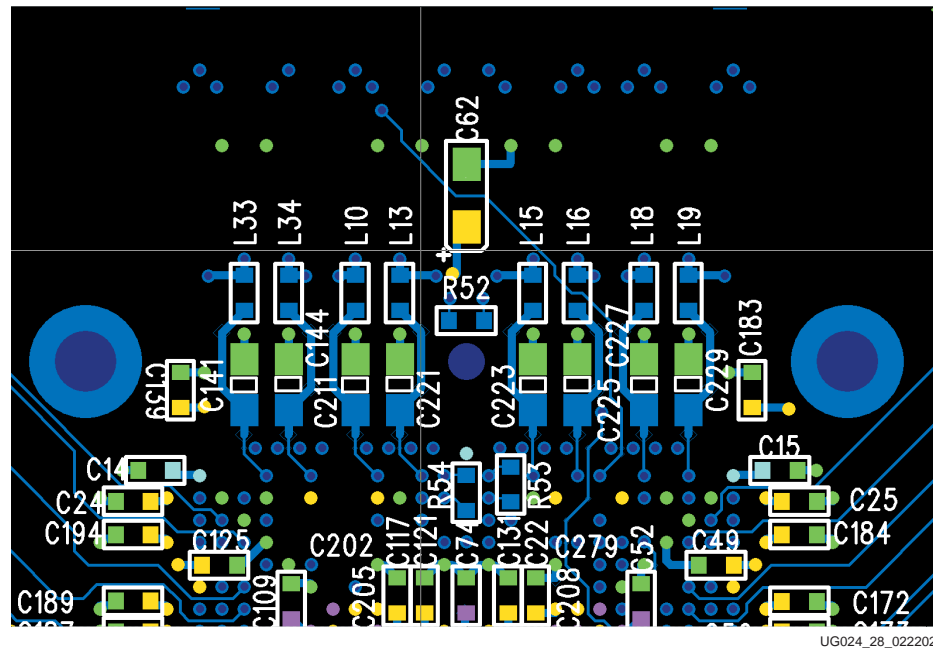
Example Power Filtering PCB Layout for Four MGTs, Bottom Layer
